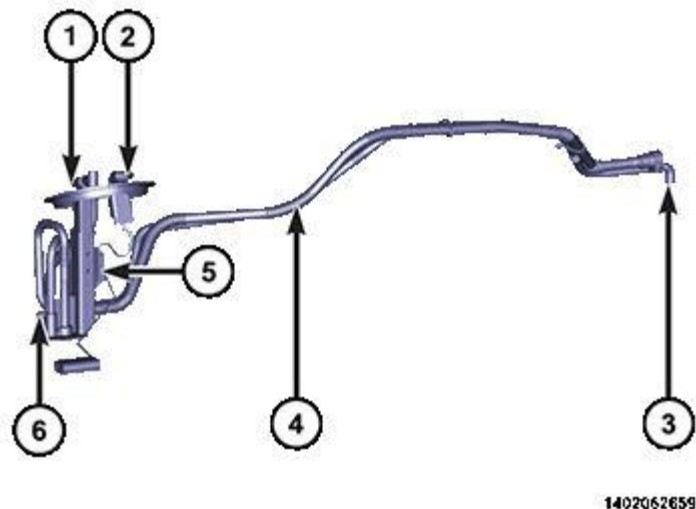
Fuel Supply Port, Electrical Connection, Transfer Line, Supply Line, Pressure Relief & Fuel
